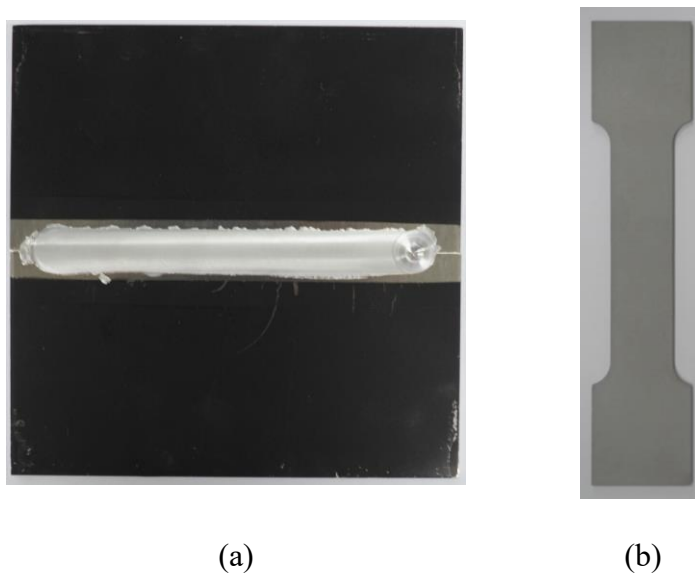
Trimming of the surface for the friction stir welded sheets in the specimen preparation. (a) Furrow at the center of the welded materials and (b) surface trimmed tensile specimen for FE-VFM
